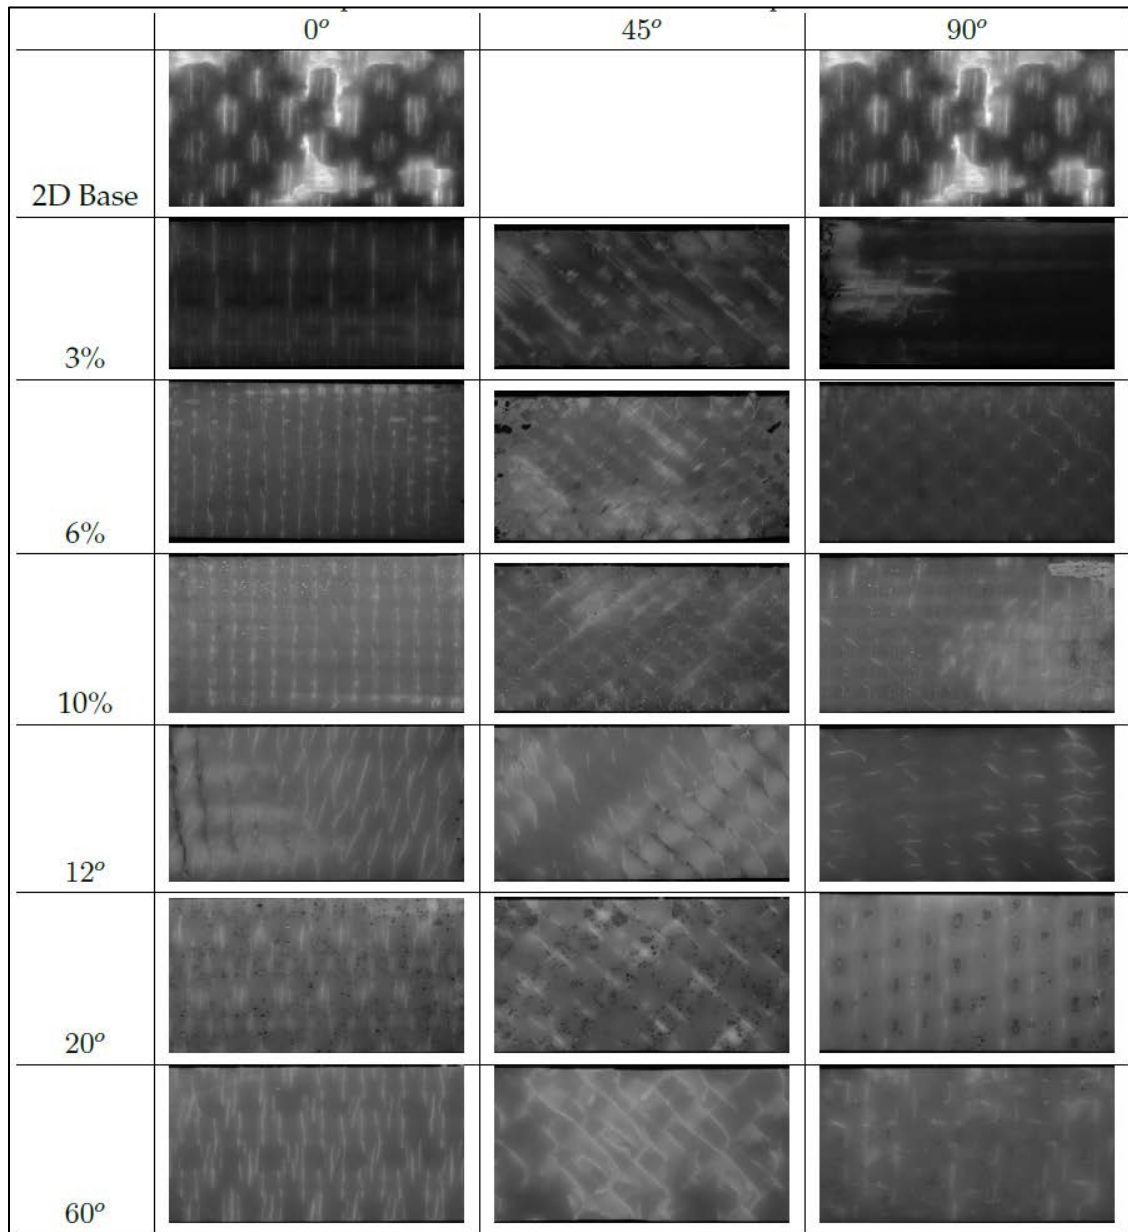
Tension specimen cracks on the surface with dye penetrant
